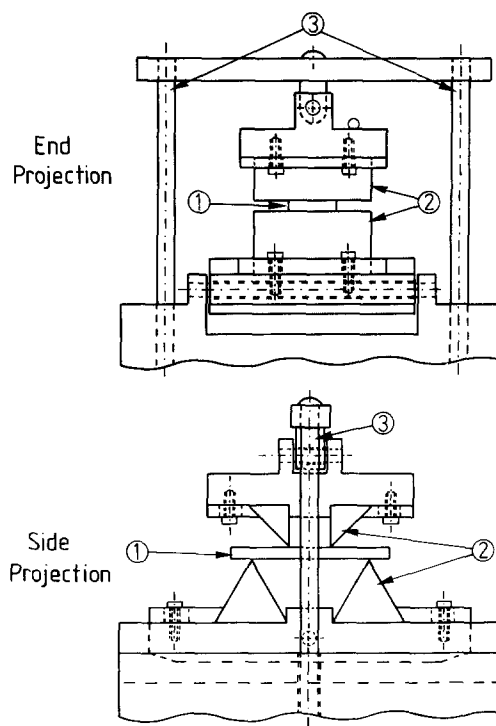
Design of the four-point bend jig. 1. Test piece; 2. Quartz knife edges; 3. Silver steel guide rods. Other parts stainless steel.
